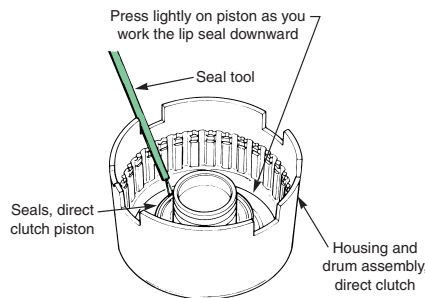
This special tool can be fabricated from copper tubing and wire to make lip seal installation easier. This tool will be much less likely than a feeler gauge to cut the new seal. (General Motors)
